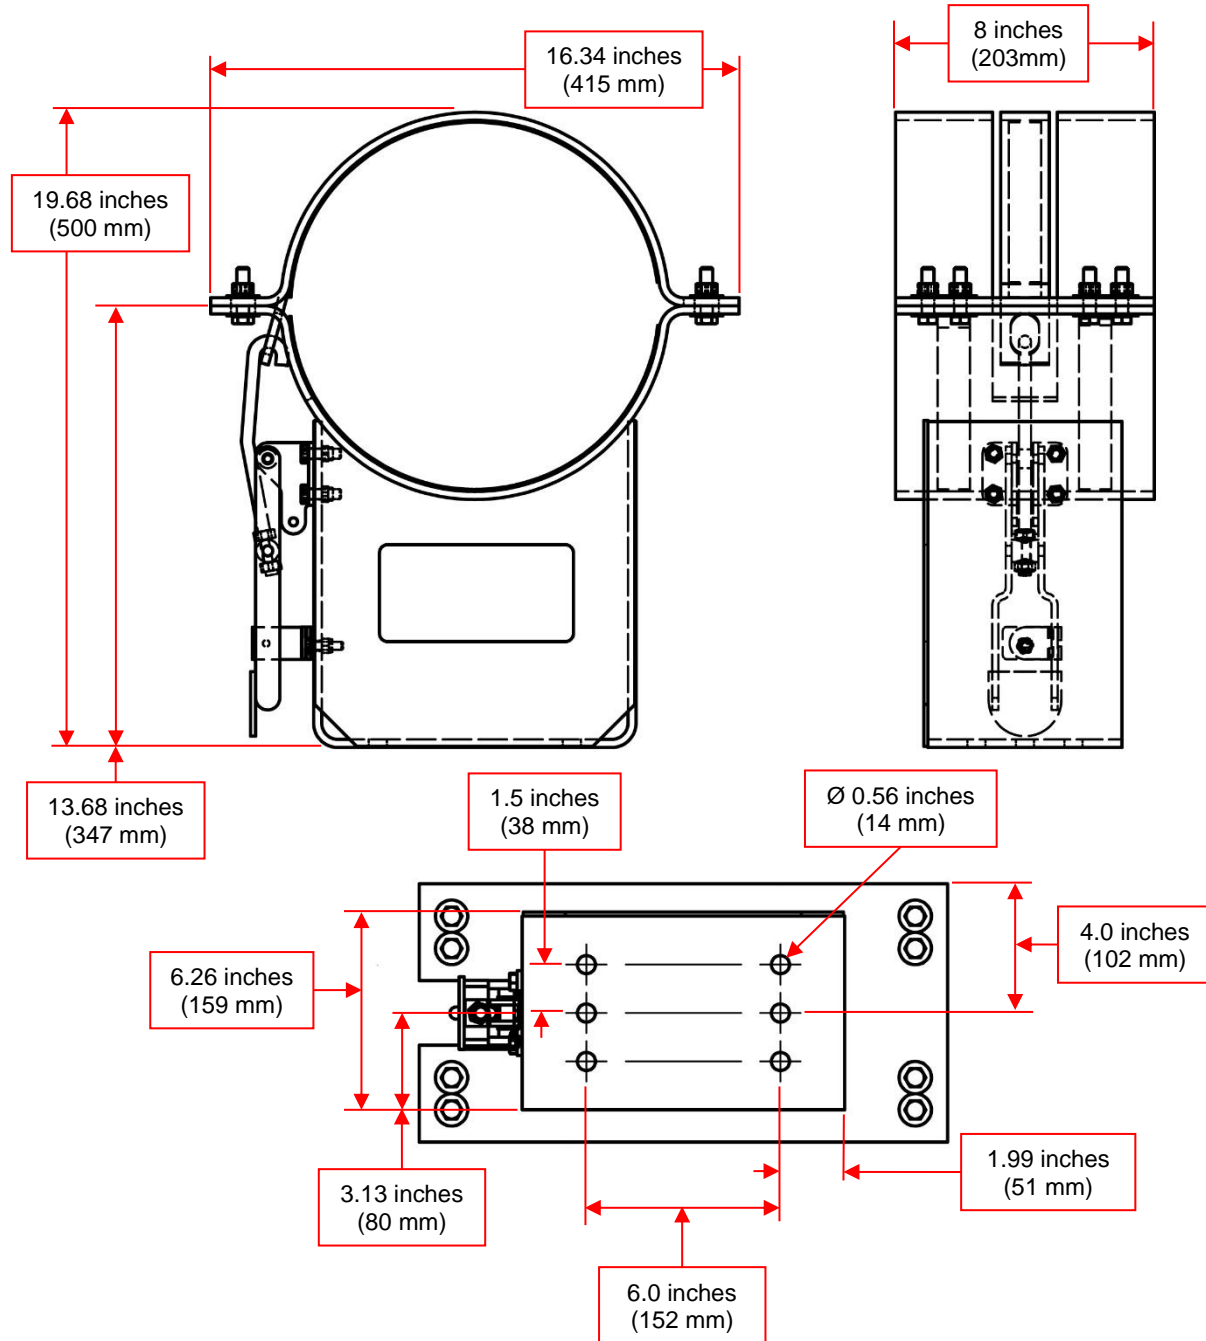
Support Bracket Assembly (Super-Heavy-Duty) Installation Specifications (P/N: 909984 Shown)
